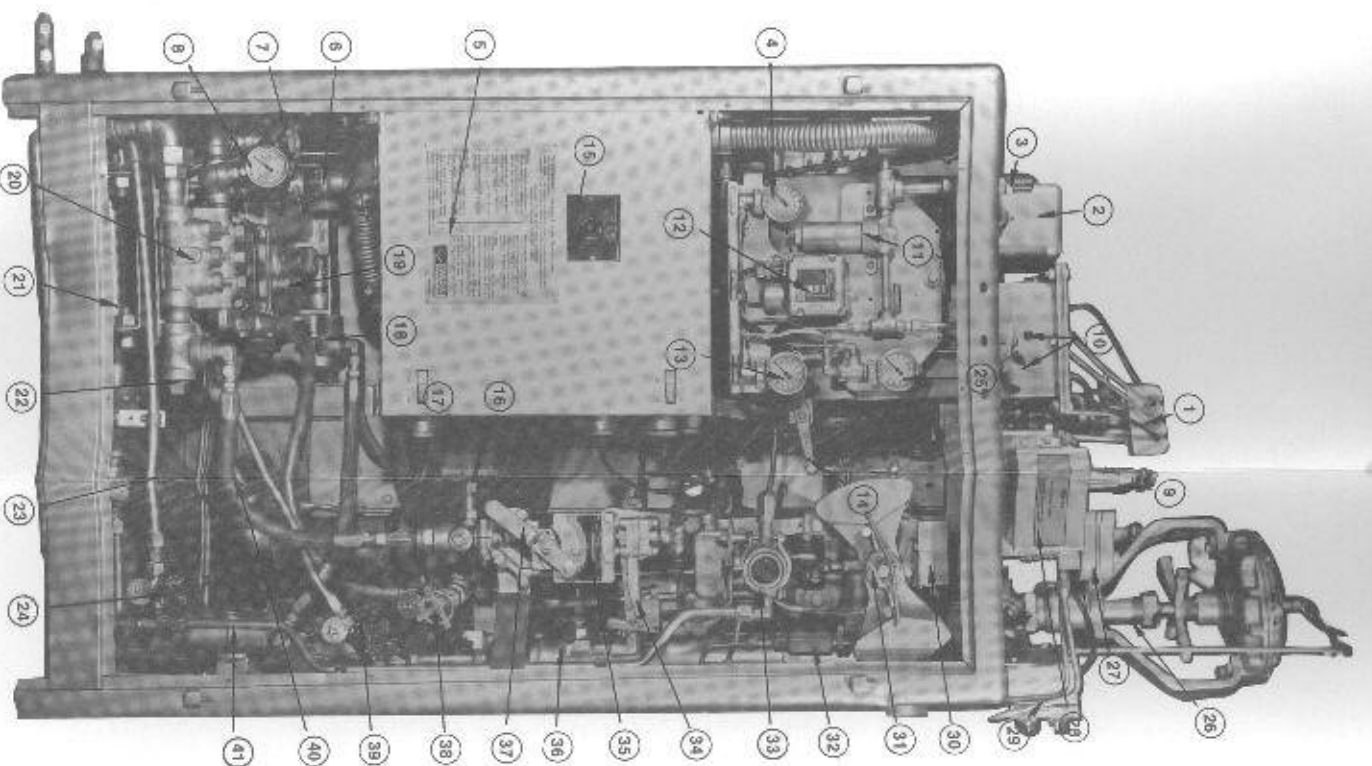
OK-4625-74 RIGHT HAND STEAM GENERATOR (FRONT VIEW)
